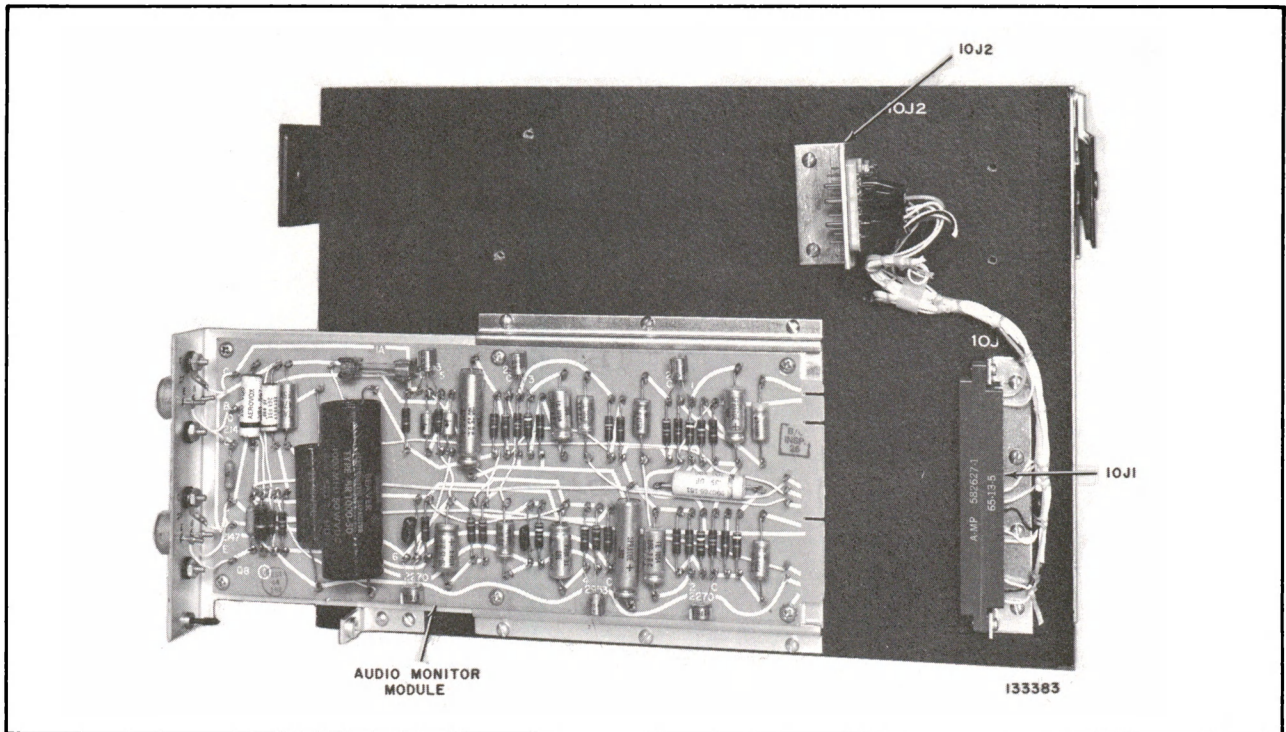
Audio Monitor Module and Speaker Housing, Rear View, showing Audio Monitor Module partially removed from Speaker Housing
